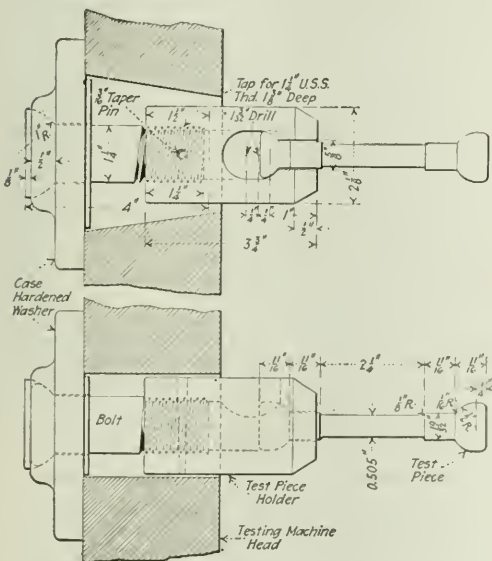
DETAILS OF TEST PIECE AND HOLDER
